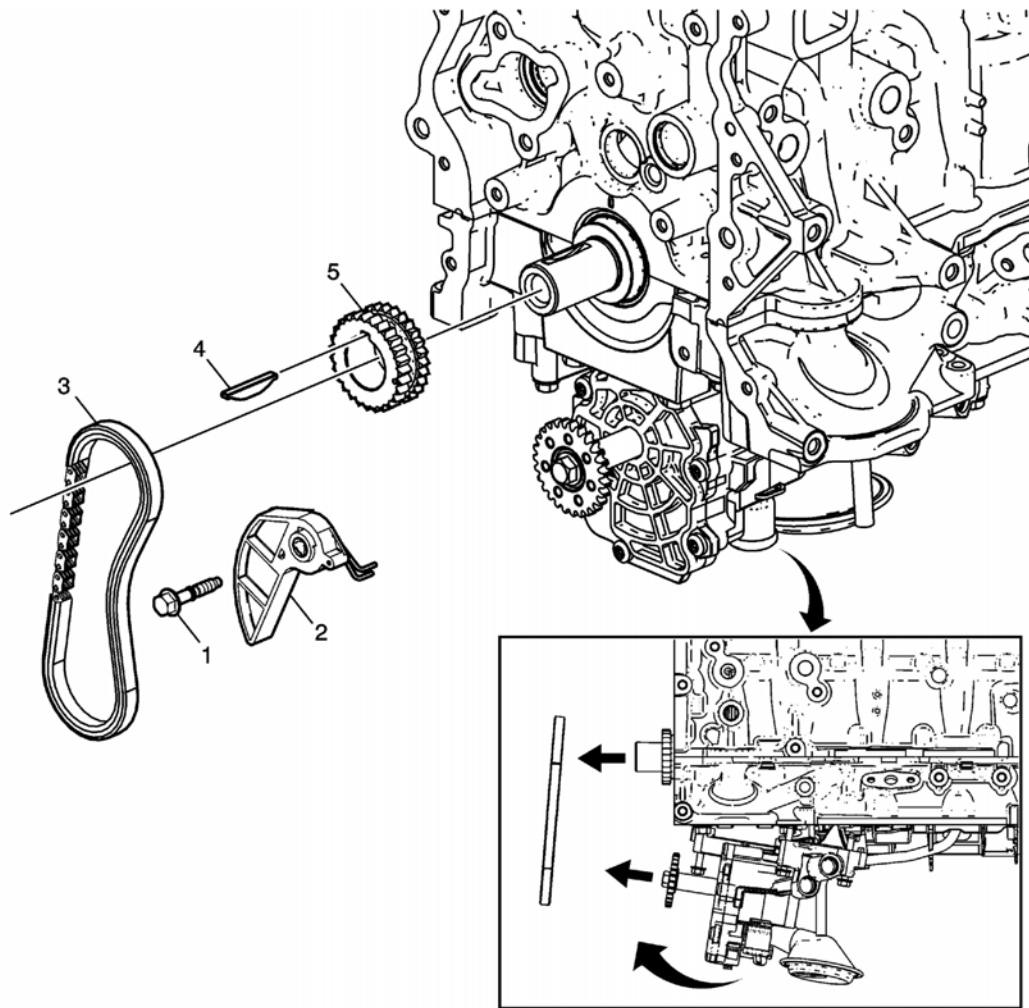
Oil Pump Drive Chain and Crankshaft Sprocket
